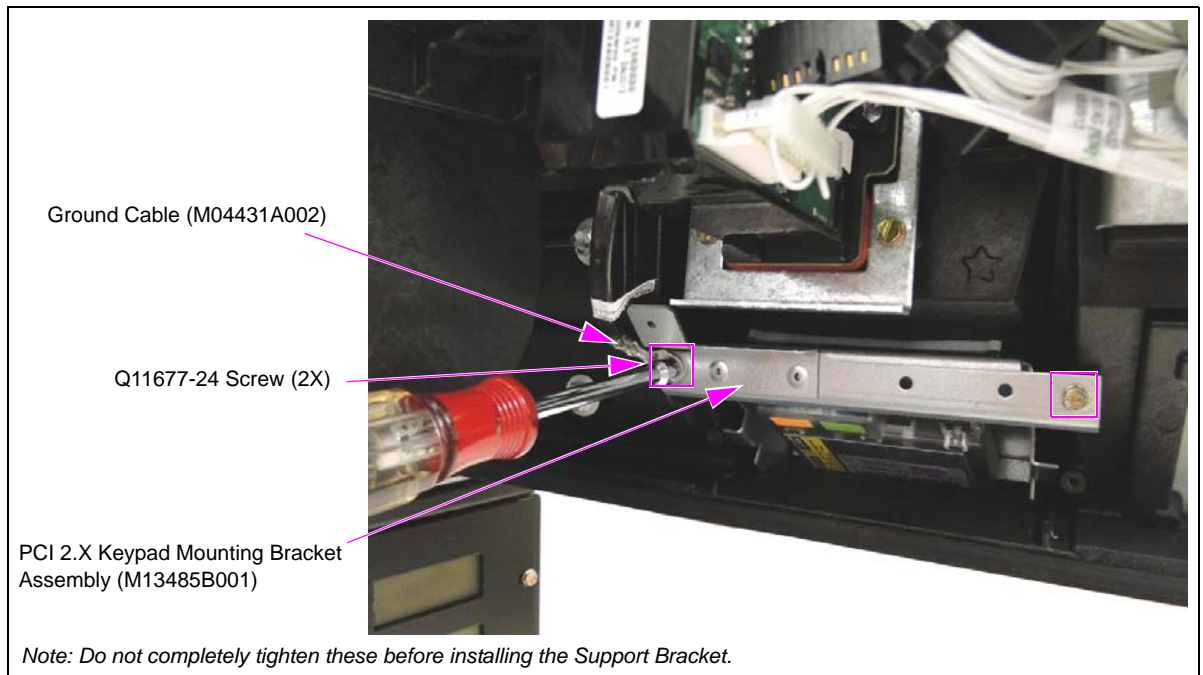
Mounting SPOT PCI 2.0 Keypad on PCI 2.X Keypad Bracket Assembly
